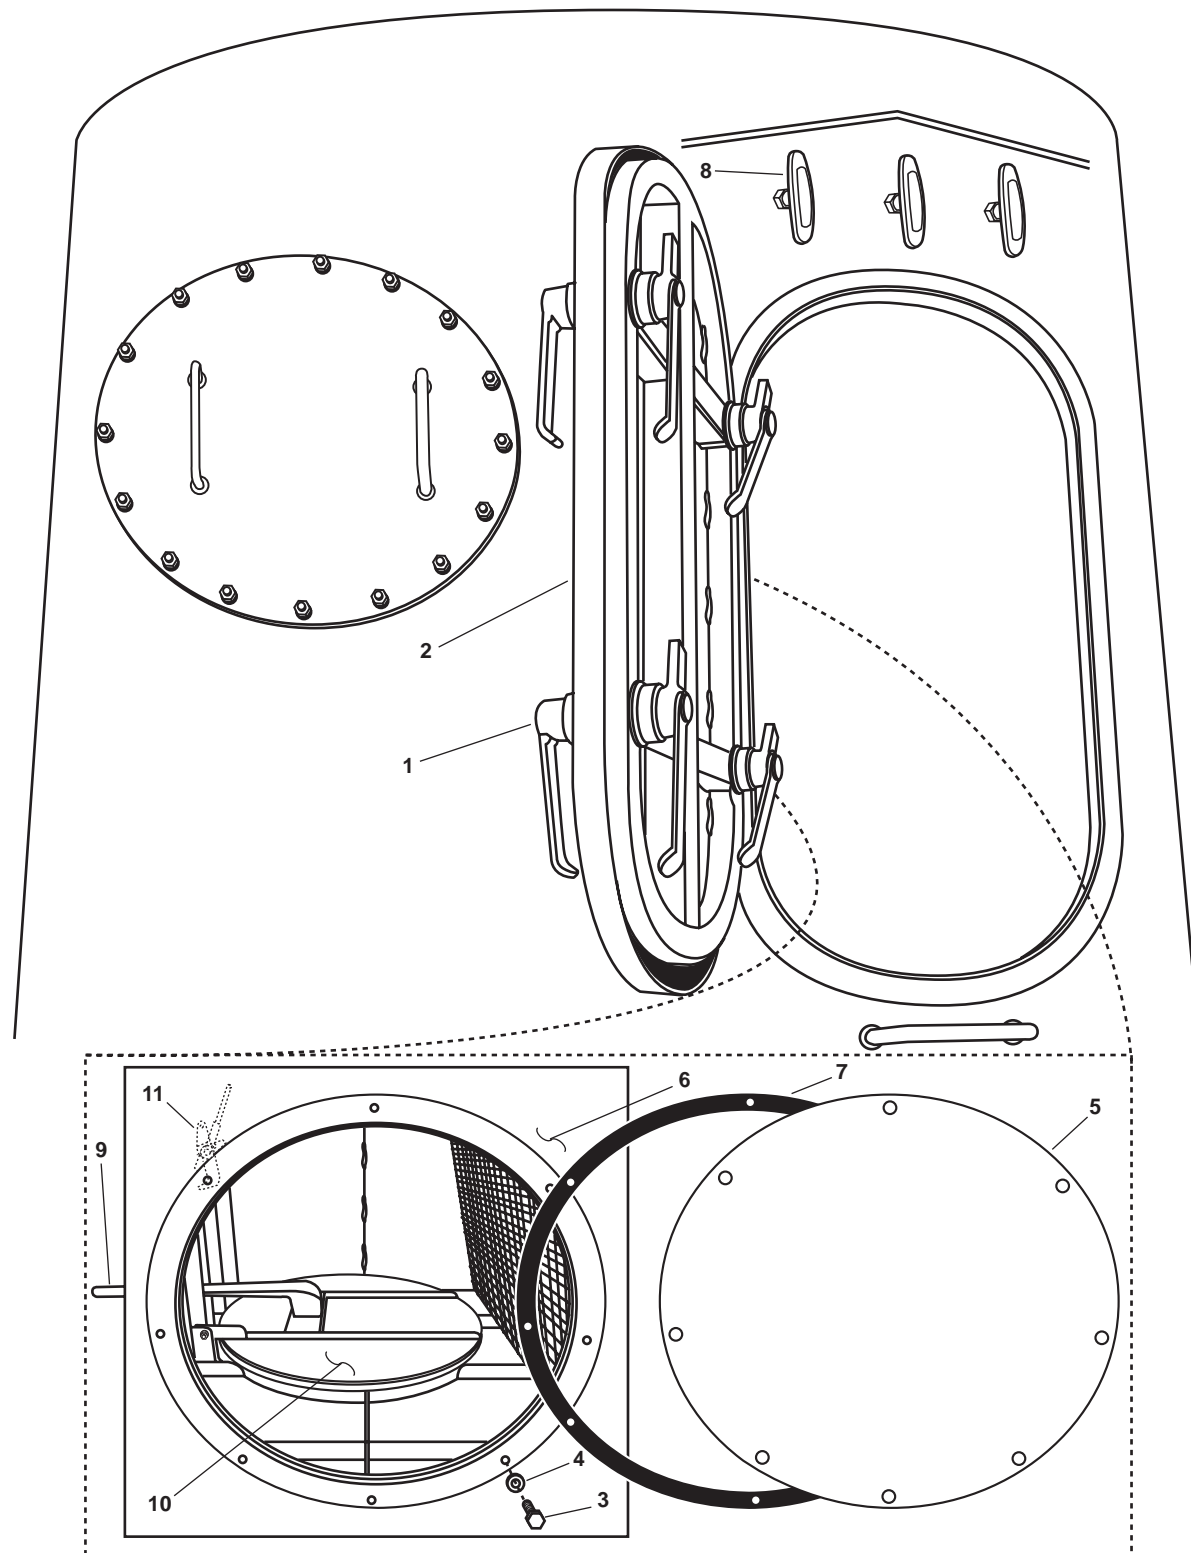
Access to Engine Room Ventilation Exhaust Assembly Fire Flap
